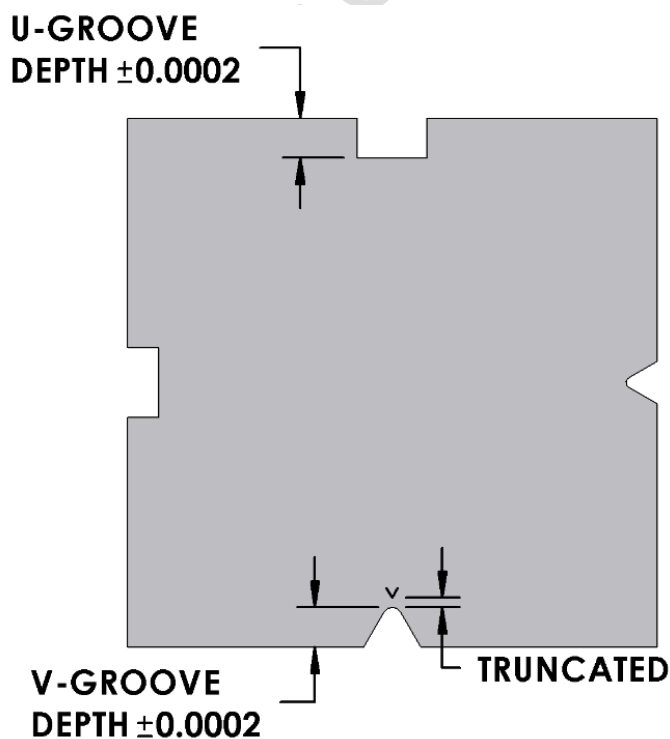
Round Thread Height Gauge Setting Standard (Thread Height Standard)
